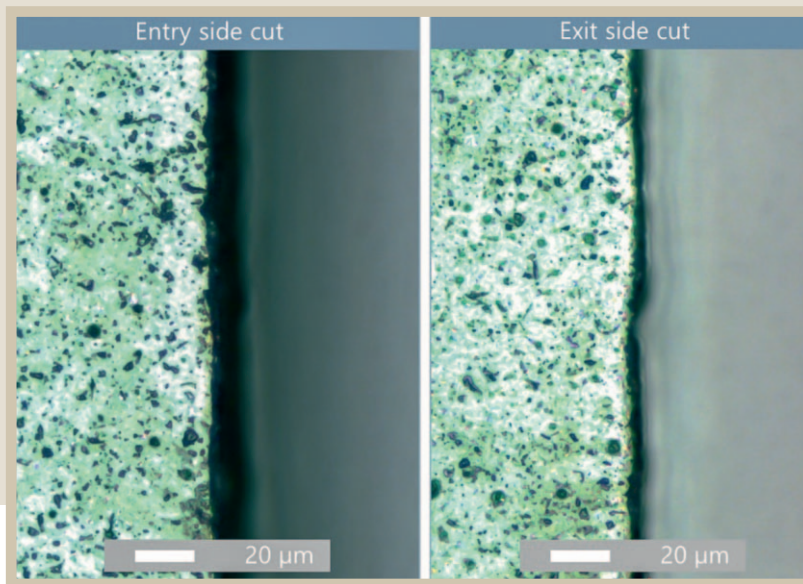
Entry and exit surfaces of a 900 µm thick FR4 PCB after laser cutting at 20 mm/s net cutting speed
